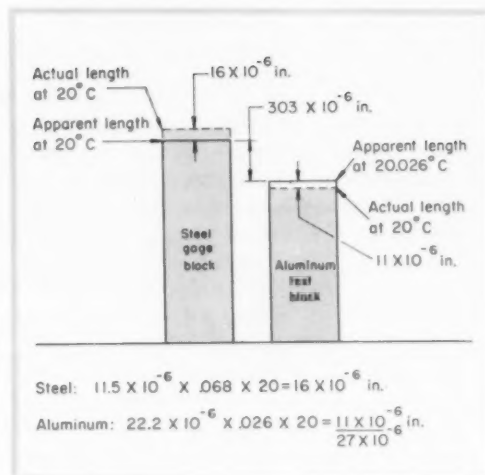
Dimensional effect of different temperatures on aluminum workpiece and steel gage block.
